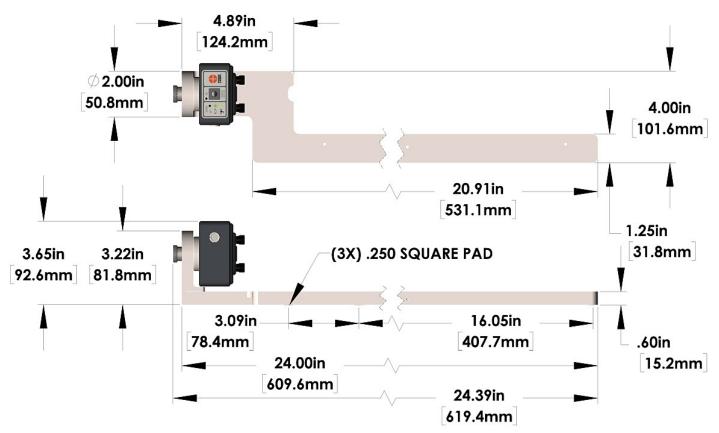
A-703SP-LM Laser Mounting Fixture Dimensions
